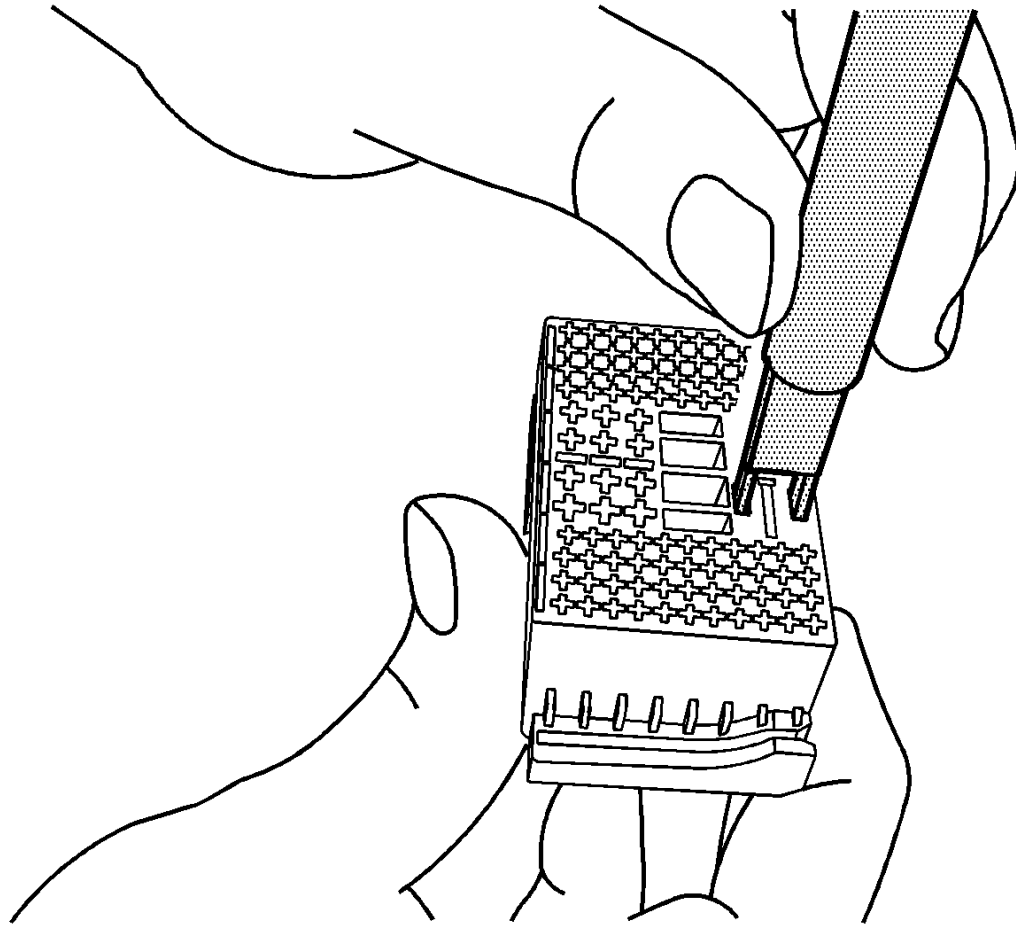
Releasing Lock Tabs - Tyco/AMP (102-Way Inline)
